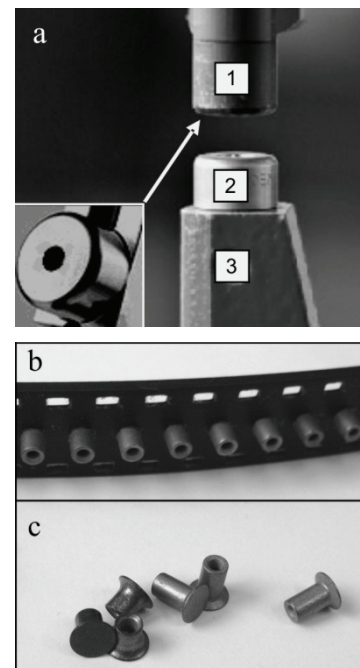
Partial view: a) of real world SPR riveting machine (1 – blank-holder, 2 – die, 3 – mounting), b) belt magazine with rivets, c) individual rivets (supplied to the magazine of the pneumatic feeder).
